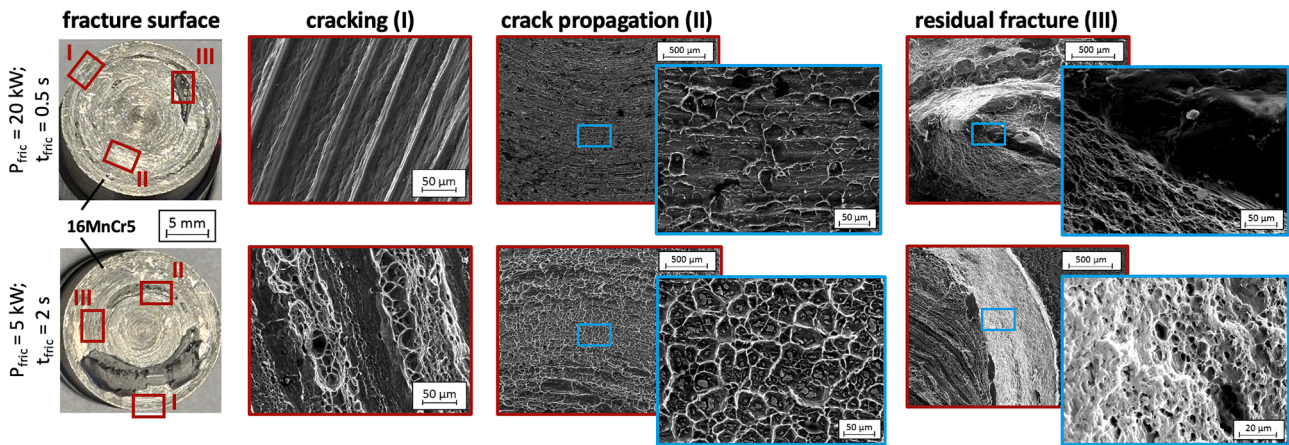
Fracture surface analysis of the steel specimen.
